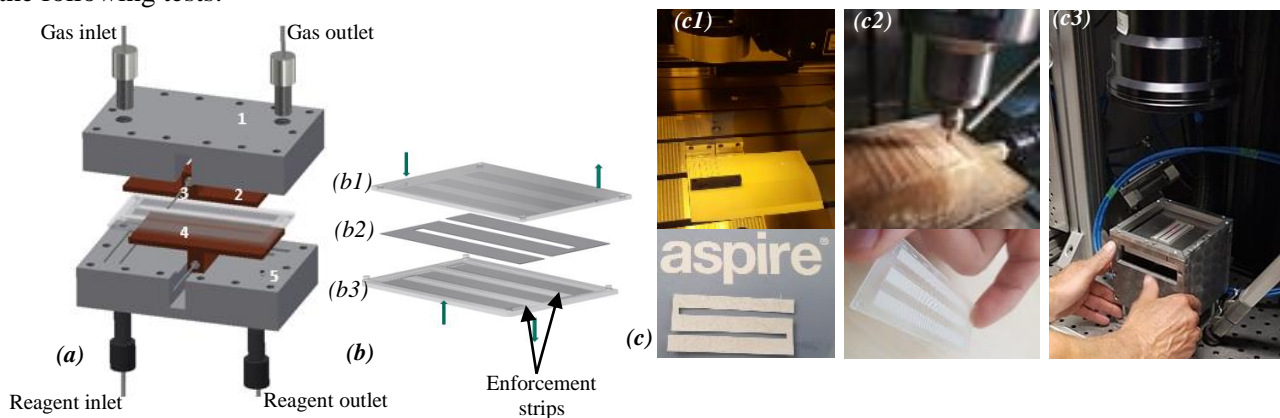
(a) (1) – Holder. (2) – Copper layer. (3) – Cartridge heater. (4) – Gas-liquid contacting chip. (5) – O-ring. (b) Gas-liquid contacting chip, exploded view: (b1) – Gas layer, (b2) – Double-sided membrane, (b3) – Liquid layer. (c) Fabrication steps of the gas-liquid chip contactor: (c1) CO_2 laser membrane cut. (c2) Meandering channels micro-milling process. (c3) Solvent-based laser welding.
